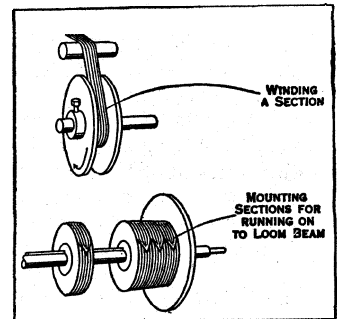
SECTION WARPING, SHOWING WARP YARN WOUND INTO SECTIONS (TOP), AND SECTIONS MOUNTED SIDE BY SIDE TO RUN YARN OFF ON LOOM BEAM (BOTTOM)
